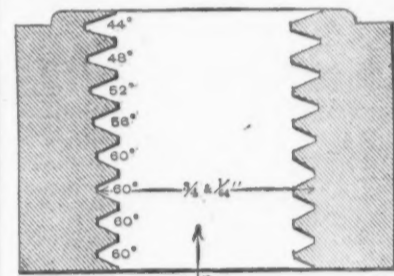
New Form of Thread for Nuts to be Used on Ordinary Bolts.
